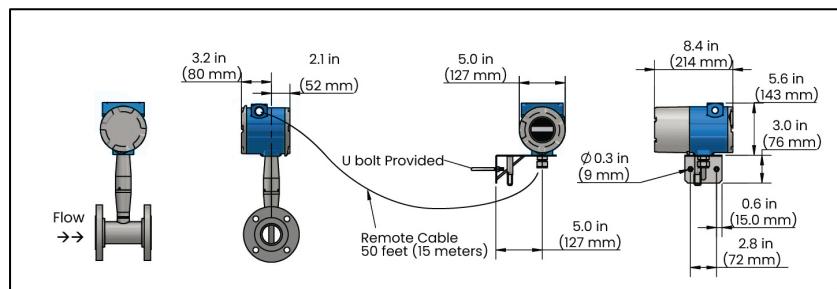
Tek-Vor 1300XP Inline Reduced Bore Flanged Models
